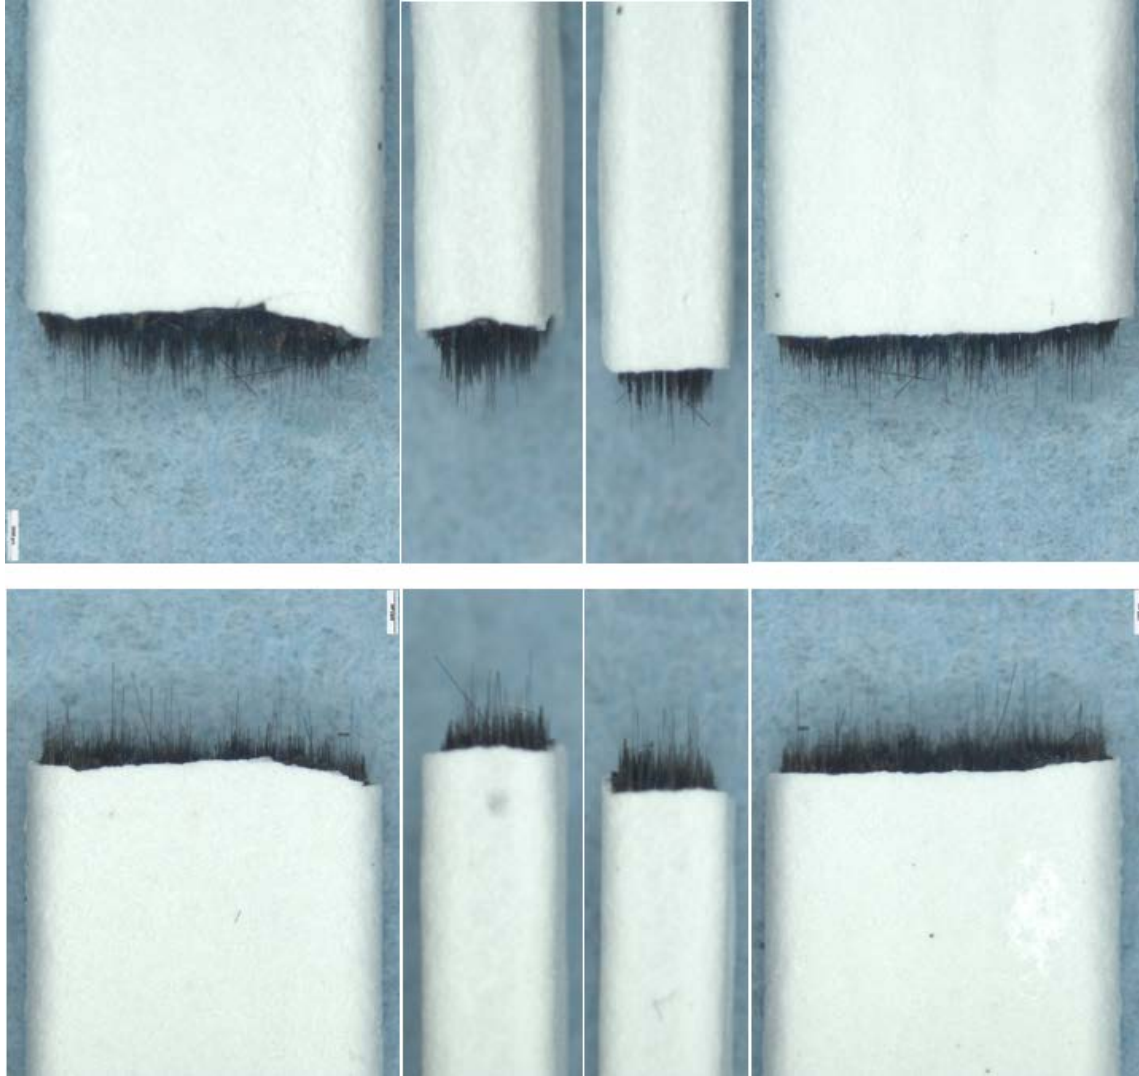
Fracture surfaces of specimen P15005-5, tested in fatigue at 1200°C in steam.
